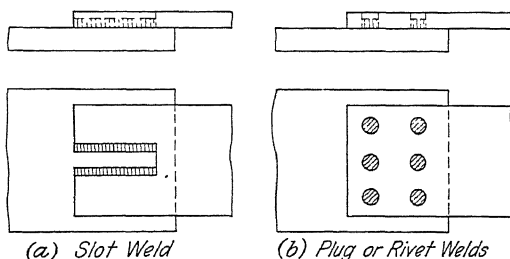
Slot Welds and Plug or Rivet Welds.
